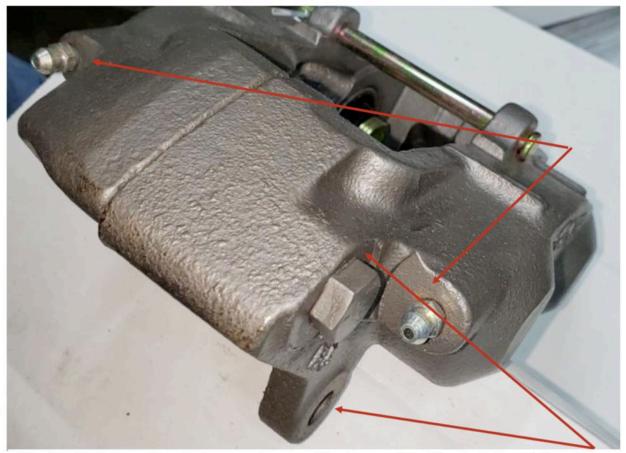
RR Caliper side. Red arrows show machined areas of the bleeder hole and the caliper mounting ear.
